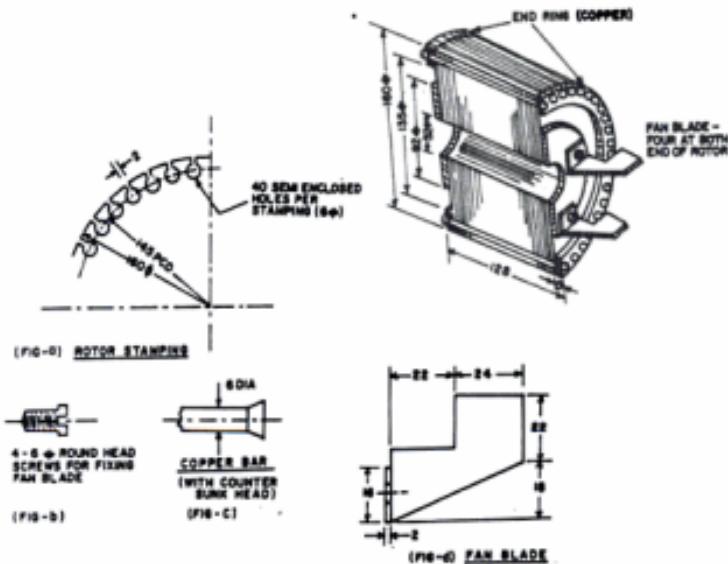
Half cut squirrel cage rotor of an induction motor with other details
